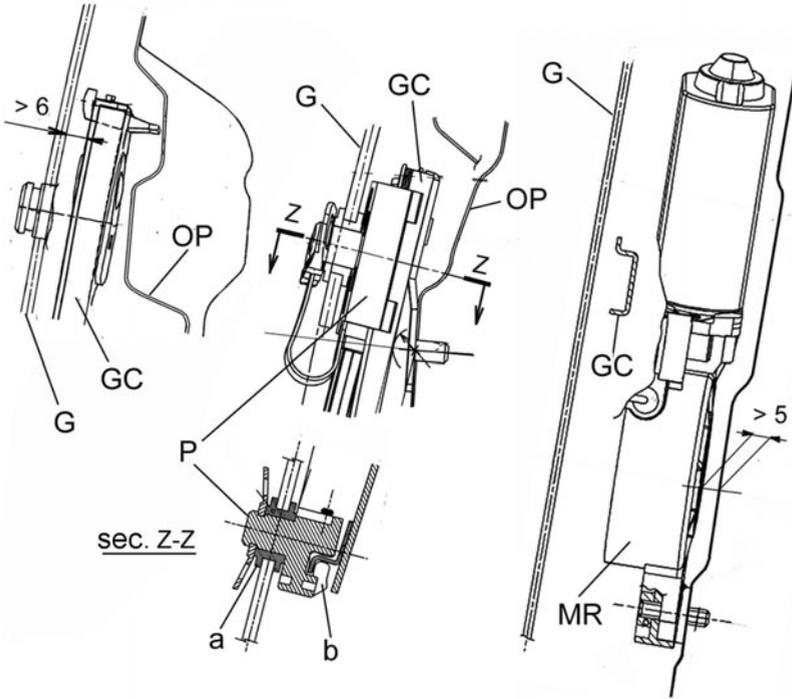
Details of regulators drive pins and recommended minimum distances. OP: door inner panel; G: glass; GC: glass guide; P: slider with clip on glass; MR: motor; a: elastic bush; b: engaging tooth.
